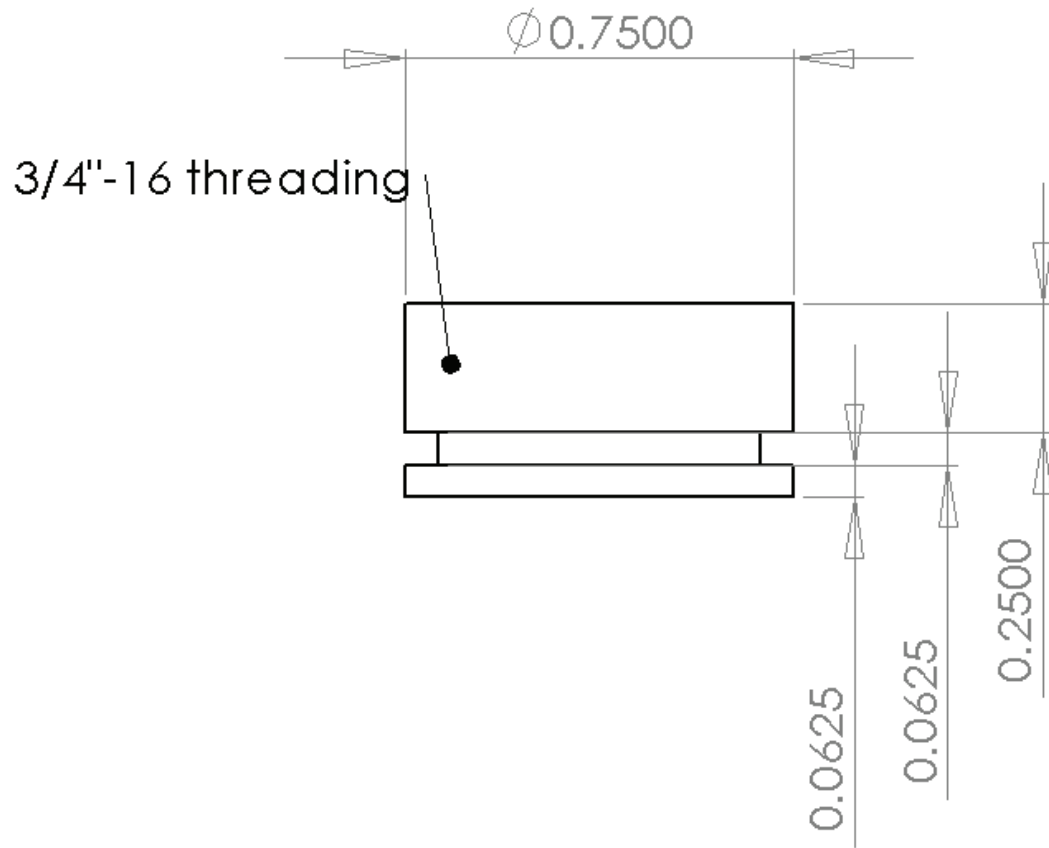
Mechanical drawing of the side view of the part *battery plug.sld
